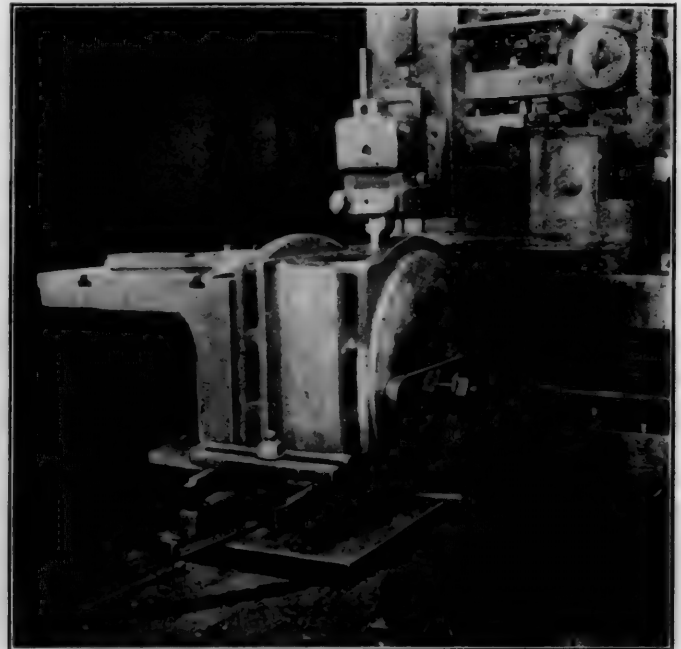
Planing End of Boxes in Draw Cut Shaper
